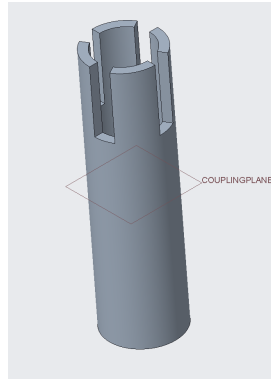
A CAD render of the interstage component. The plane visible in the render indicates the plane where the two outer body tubes will meet
